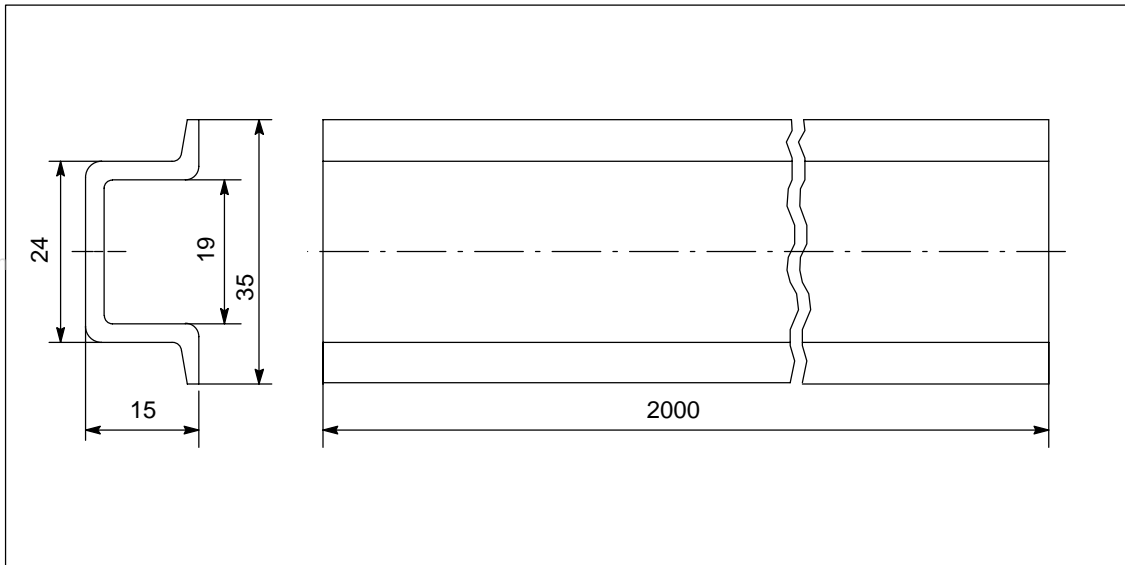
Dimension Drawing of the 2000 mm Standard Rail
